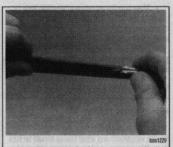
On Pylon[®] inserts, the clip at the end has to be removed prior to sliding the insert off
